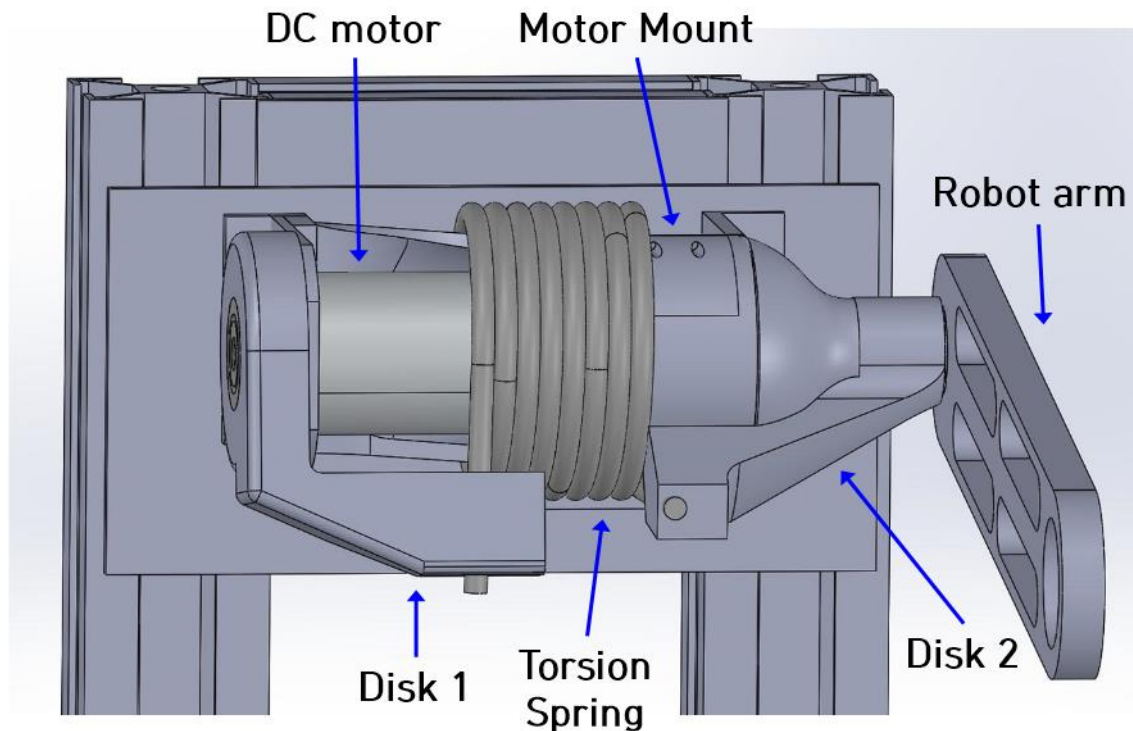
Type C SEA: Consists of a high-torque DC motor, a customized torsion spring, 3D printed disks, and a robot arm.
